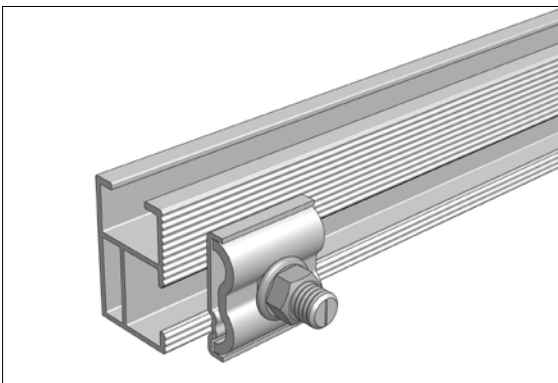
Connection of equipotential bonding/connection terminal
